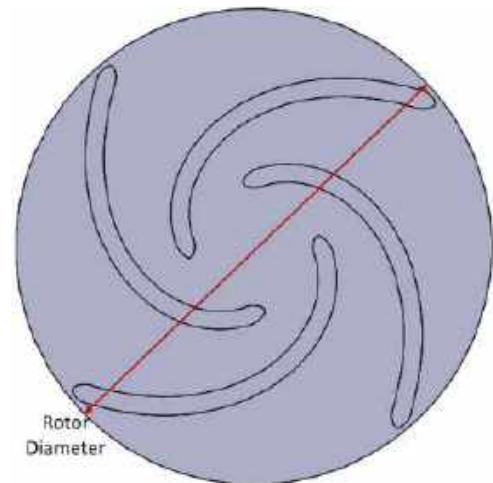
LVAD Prototype with 30 mm Rotor Diameter.
